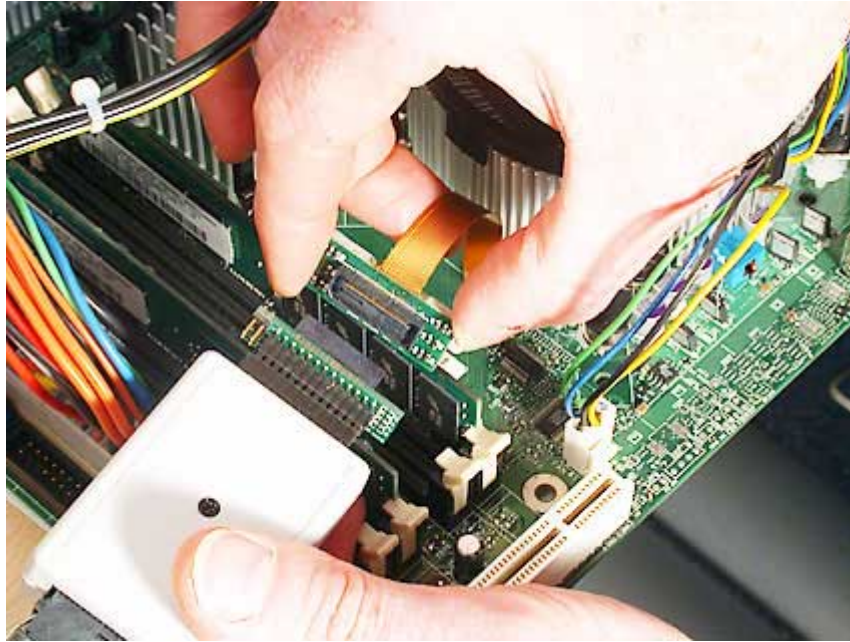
Attaching the Debug Port Adapter (DPA). In this photograph, the XDP Adapter is shown attached to the end of the DPA
